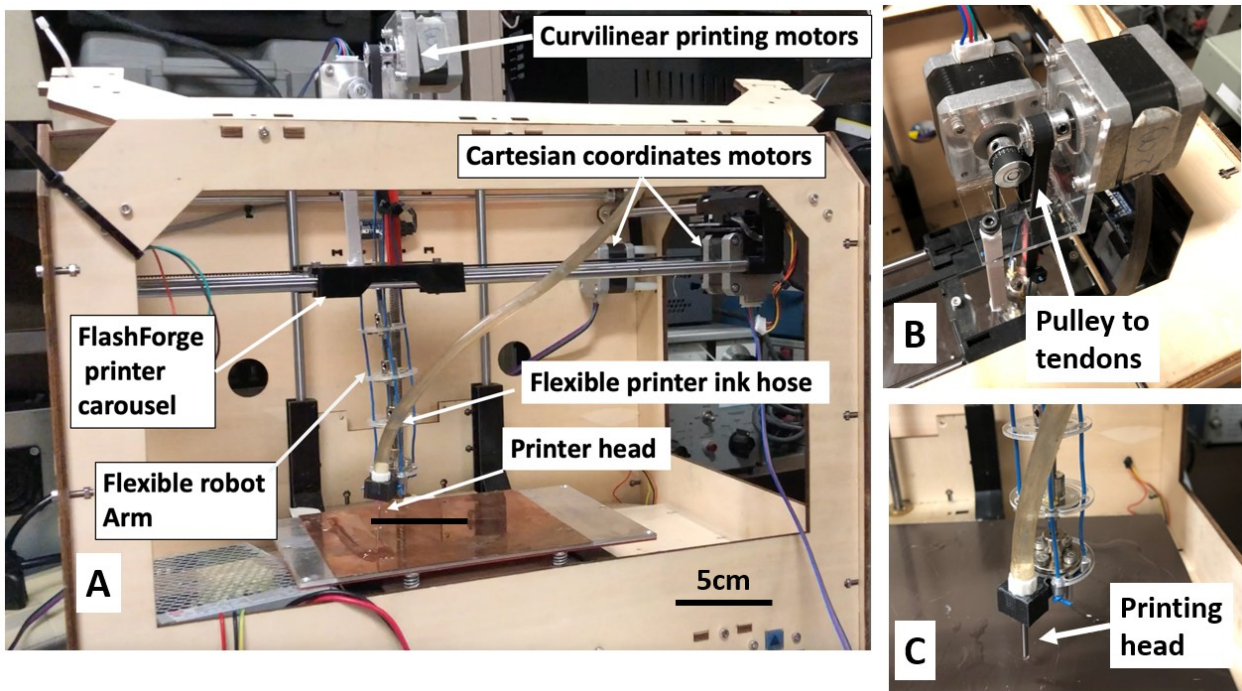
A) An ensemble photograph of the 3D cartesian/curvilinear printer. B) Higher magnification showing the two stepper motors, each of which
